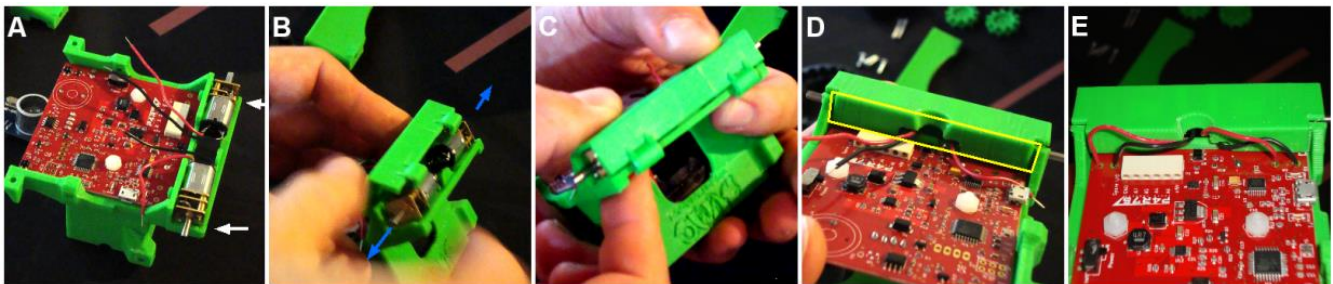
Gently snapping the motor cover into place and attaching the motor wires.
